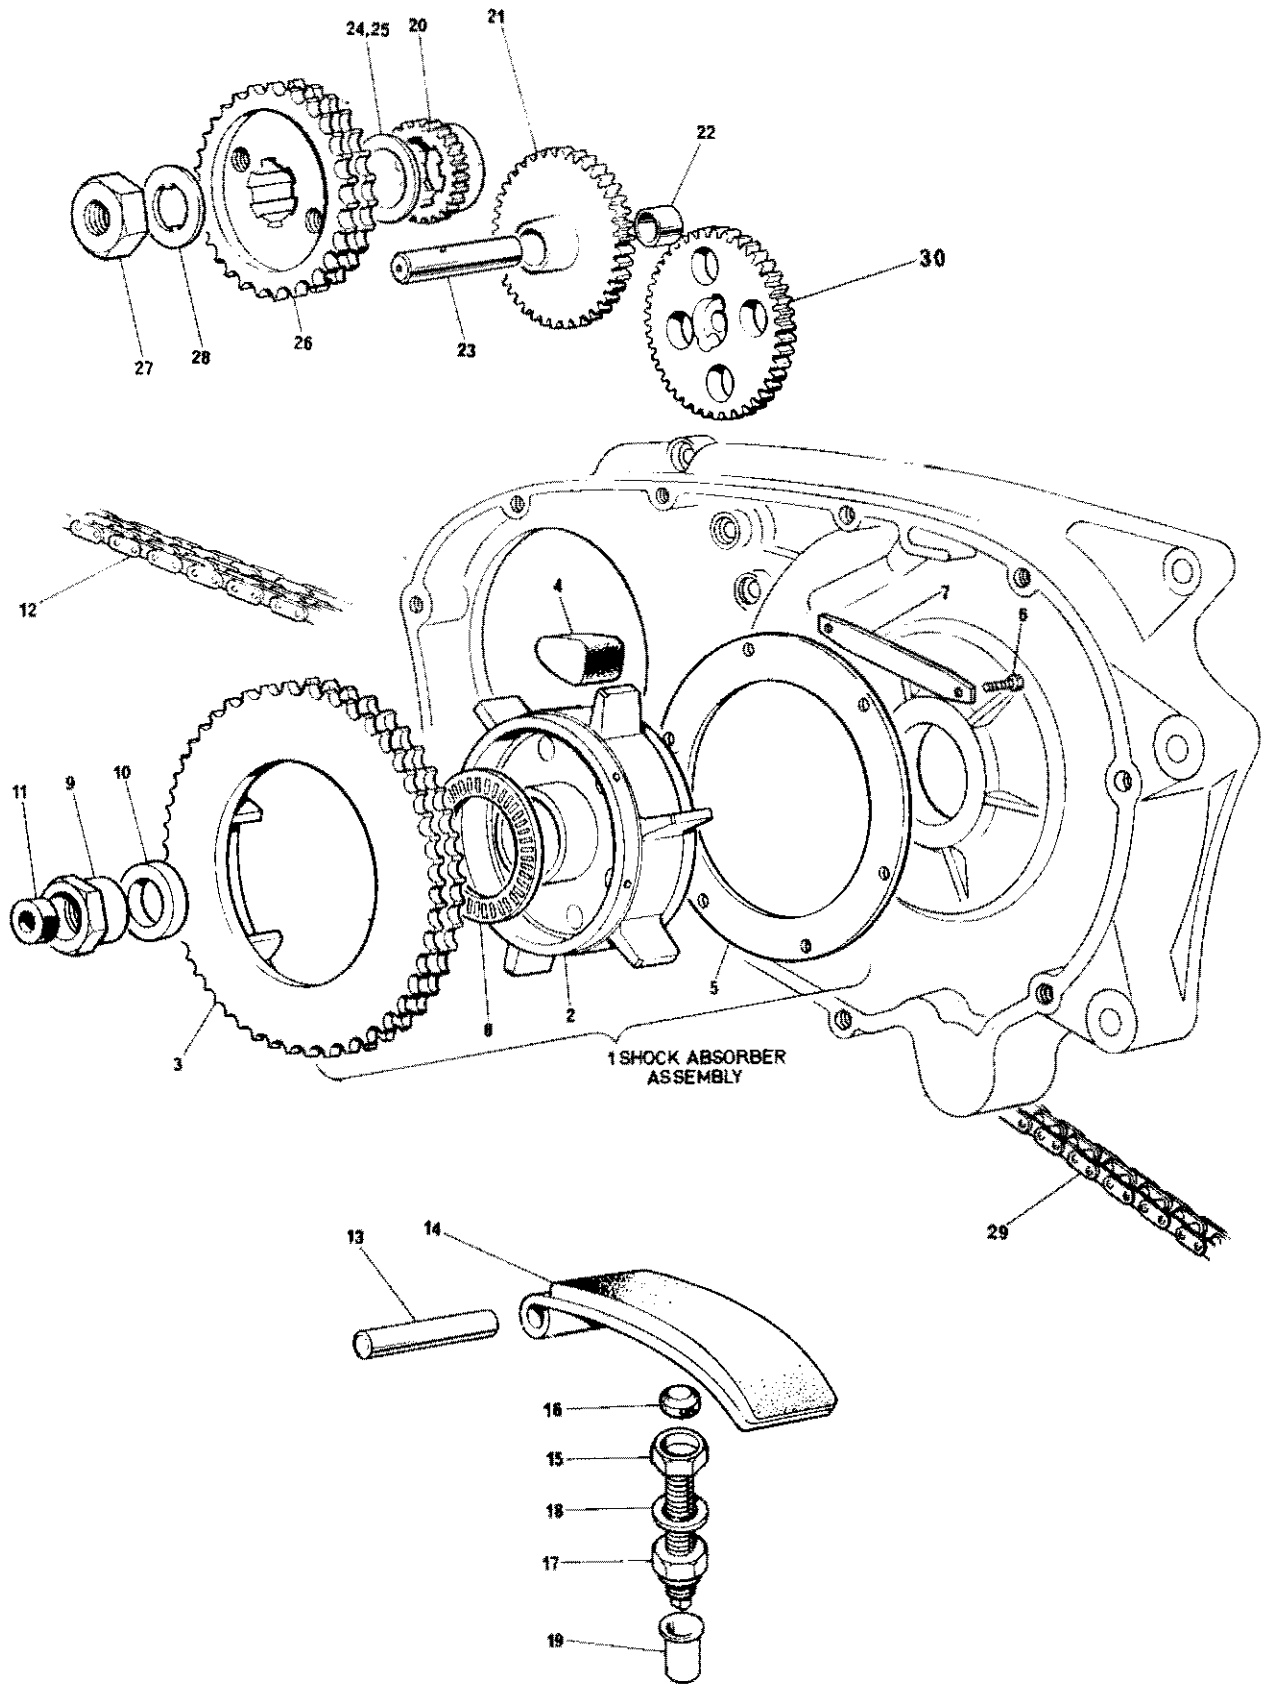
PRIMARY SHOCK ABSORBER AND OIL PUMP DRIVE
